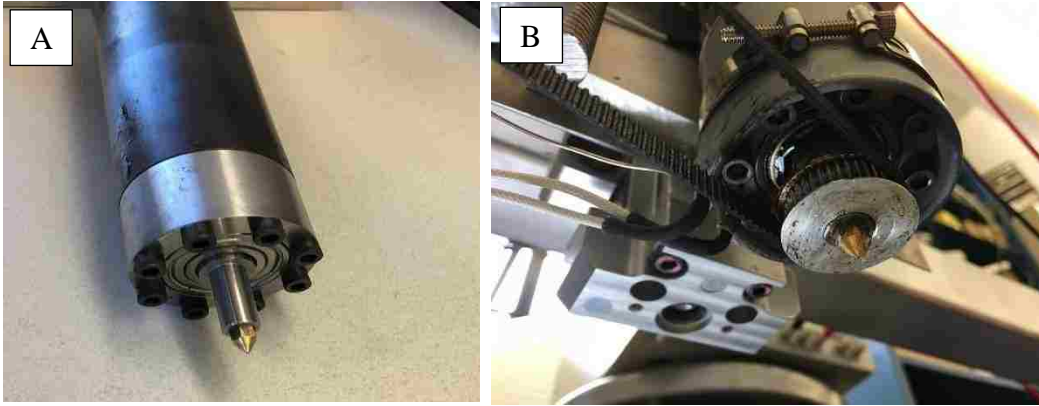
A) view of the nozzle assembly and the barrel. B) Bottom view of the mini extruder with gear and belt assembled to it.
